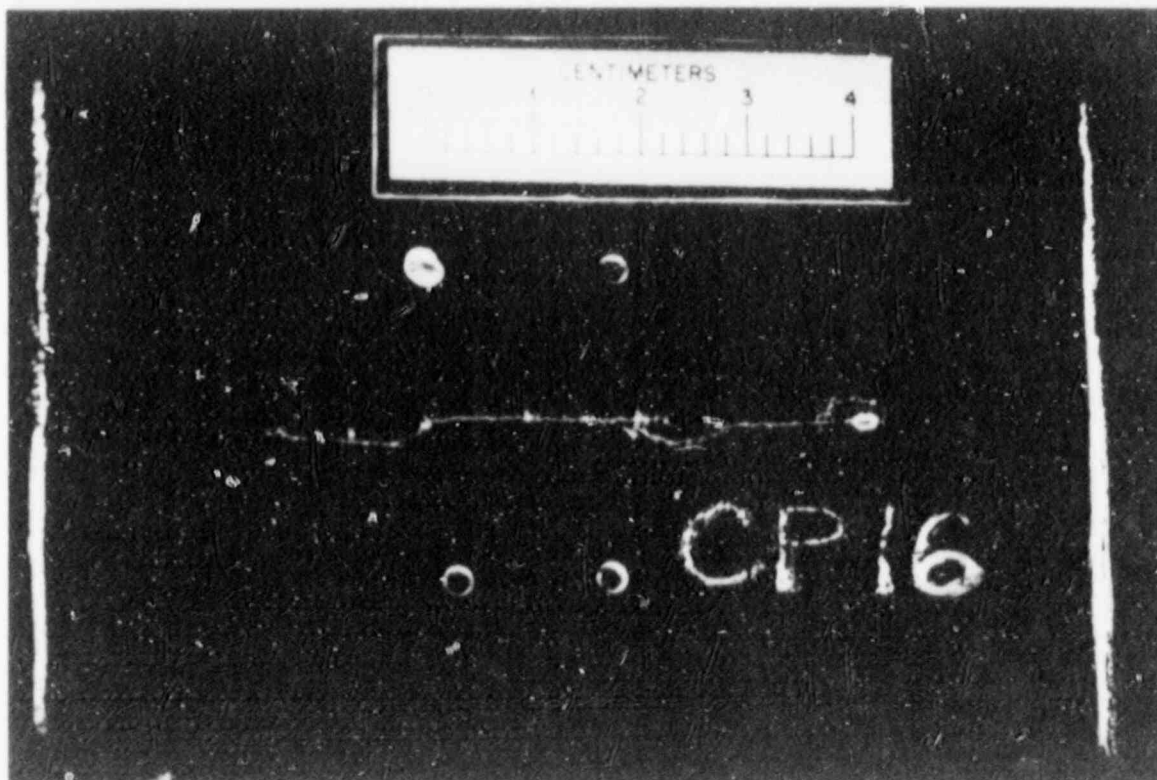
Dye penetrant indication of flaw in plate CP-16 after first event. This is the same area as shown in Fig 7.4, but no surface crack other than that in EB-weld HAZ could be detected. Two parallel lines normal to flaw were added to mark the start of cladding.
